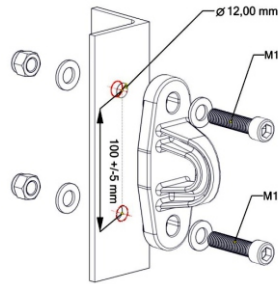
Method of screwing anchor point on steel structure using torque wrench
